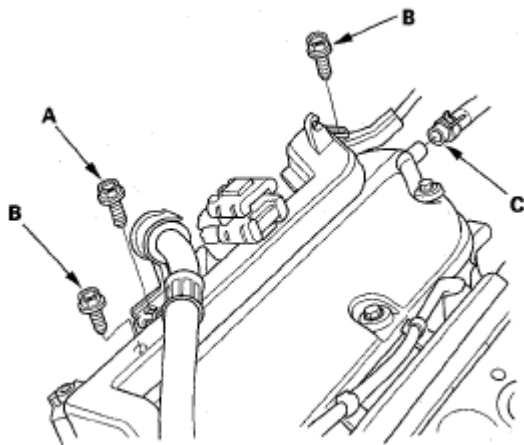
Identifying Power Steering (P/S) Hose Bracket Bolt
